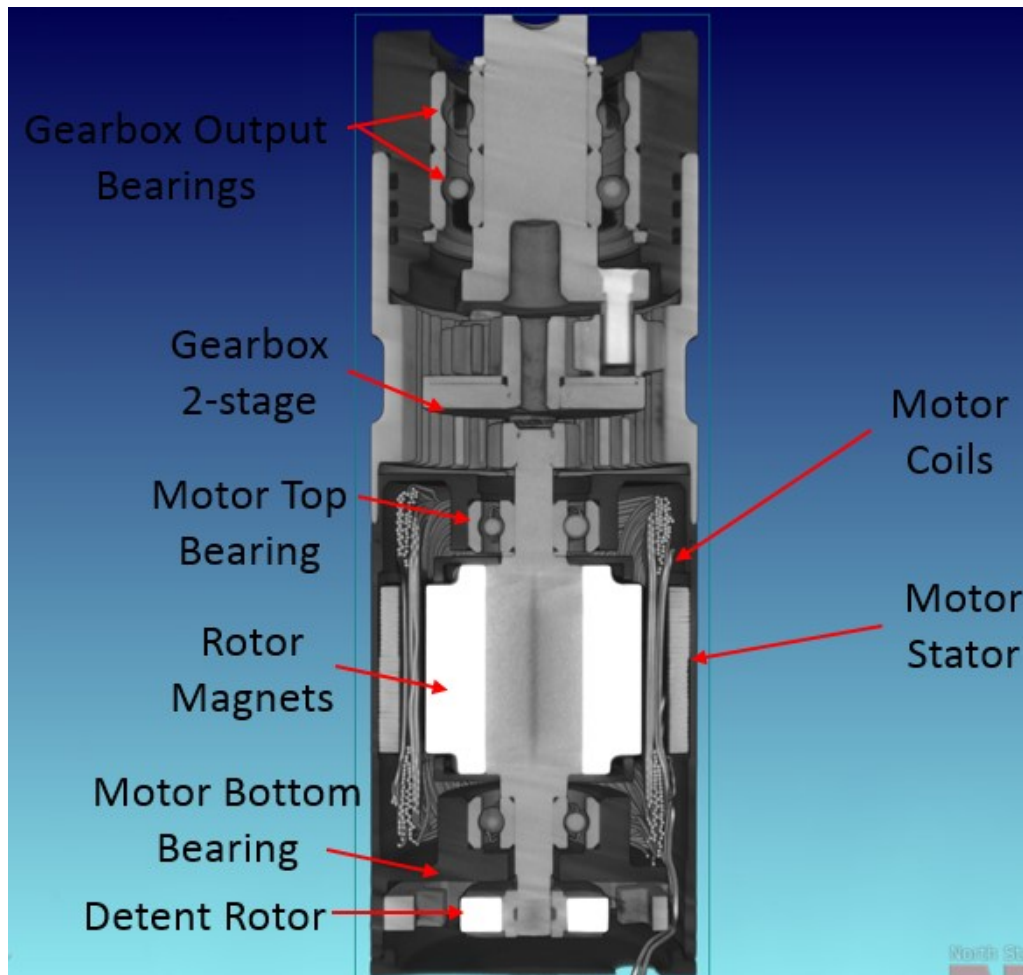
Overall Image Cross-Section of the 10 mm Actuator Assembly
